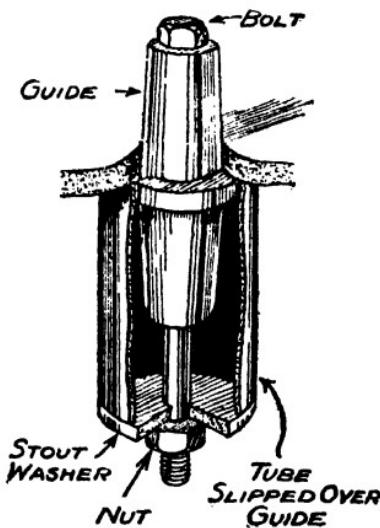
METHOD OF REMOVING WORN VALVE GUIDE.
